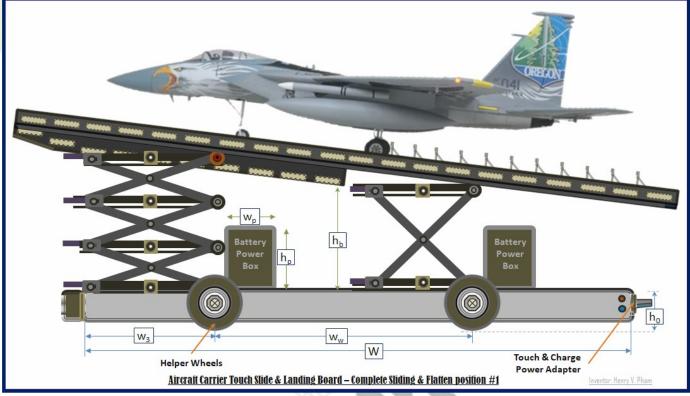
Touch-Slide & Landing Board Complete Sliding & Flatten position 1
